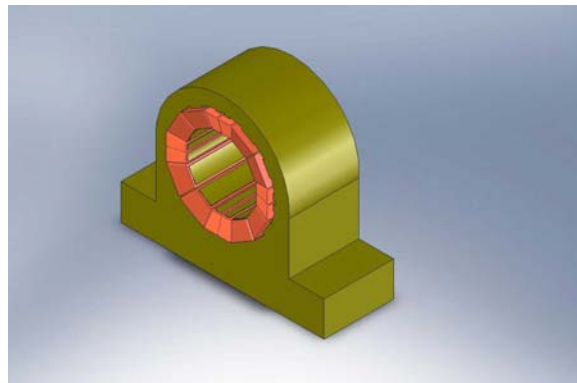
Magnetic Bearing for Fluid Film Bearing Test Rig
